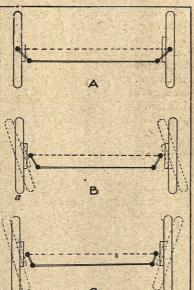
Diagrams showing why the wheels and the steering heads should be in the same plane.
